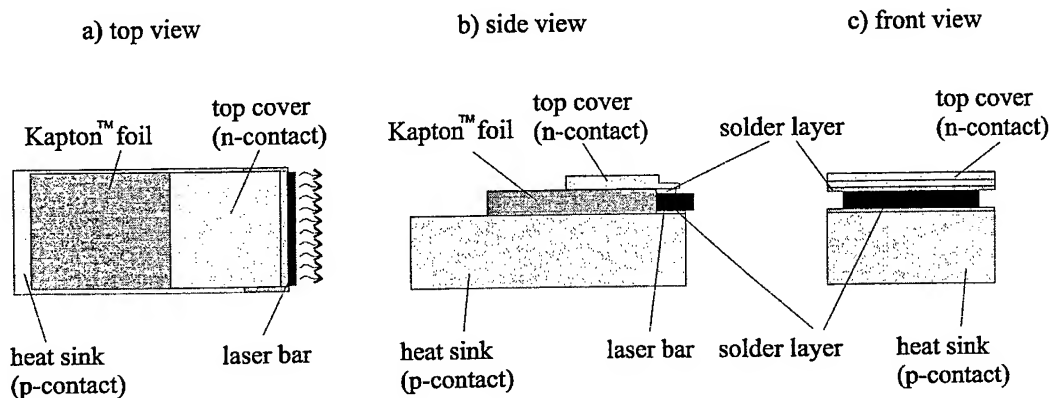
Packaging of high power diode lasers used at Fraunhofer-Institut für Lasertechnik.
